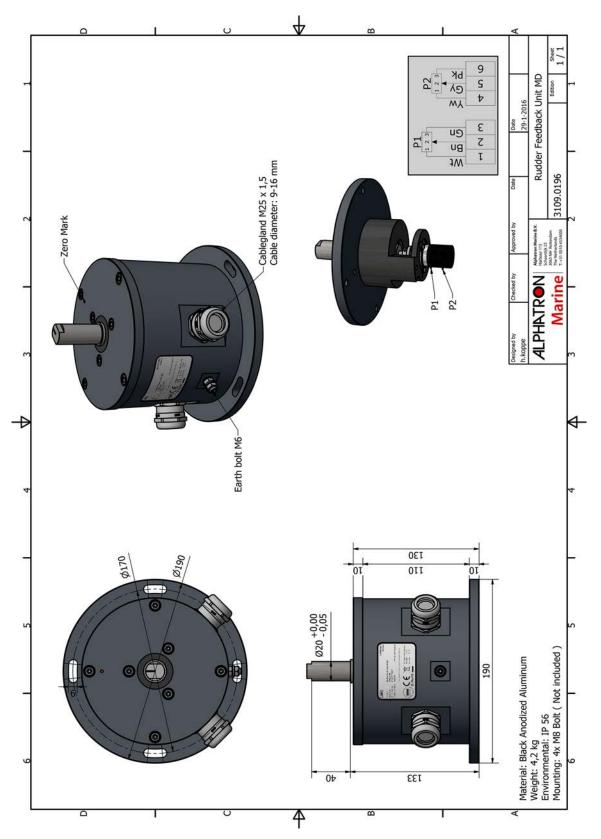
Mechanical Drawing Rudder Feedback Unit MD
